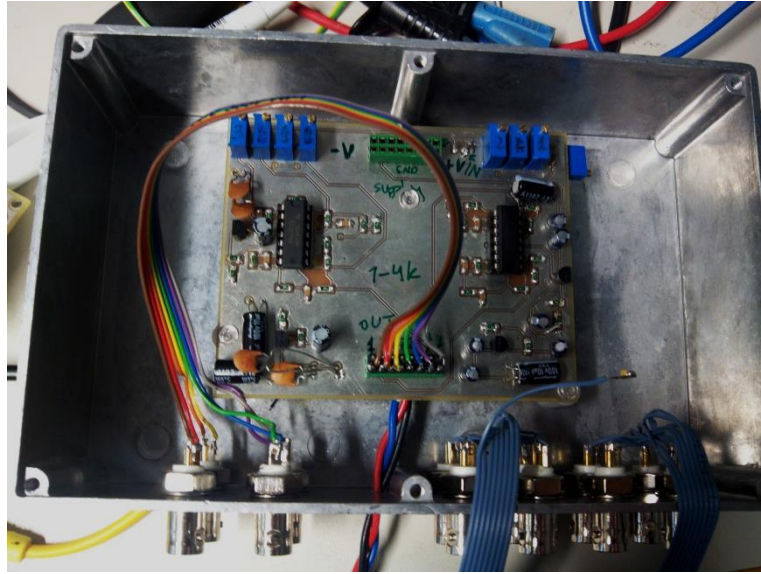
Picture of the filter PCB for 1, 2, 3 and 4 kHz.
